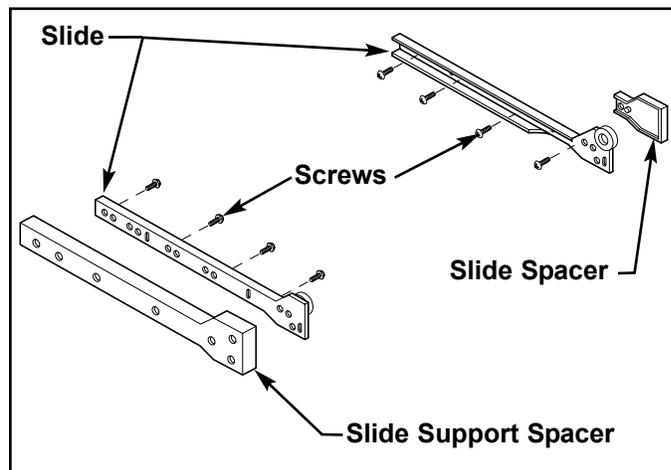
Cabinet Slide, Slide Support Spacer & Slide Spacer Removal
